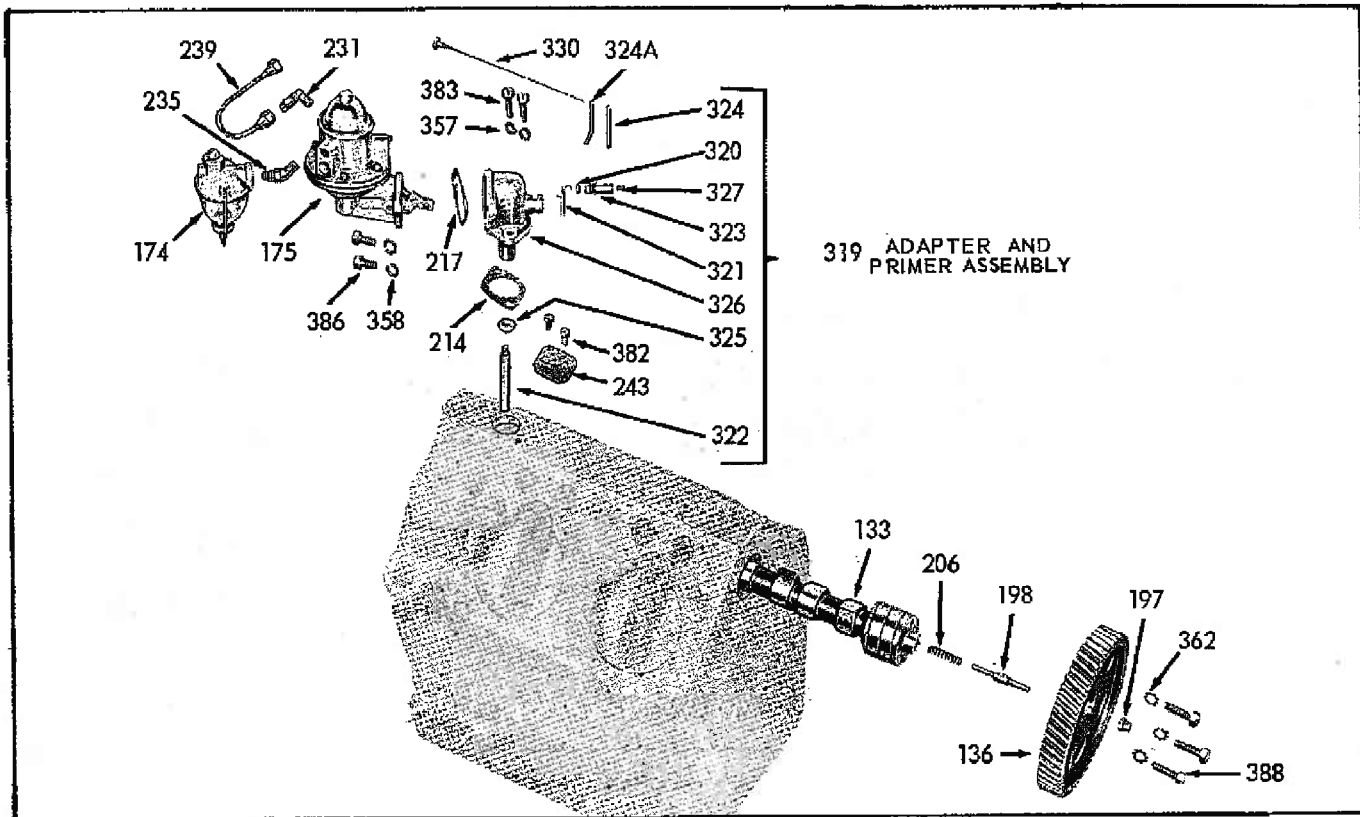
, CAMSHAFT AND FUEL PUMP MOUNTING GROUP
